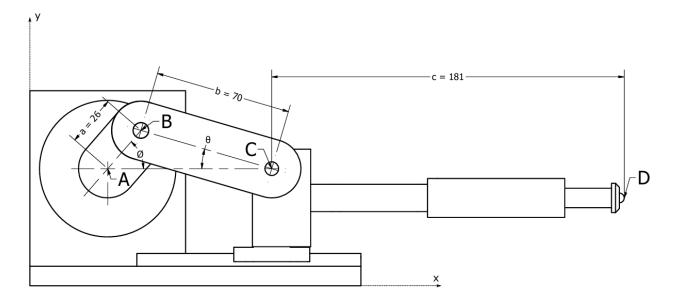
Schematic of the crank-based burnishing mechanism, showing the geometric layout and functional arrangement of components
